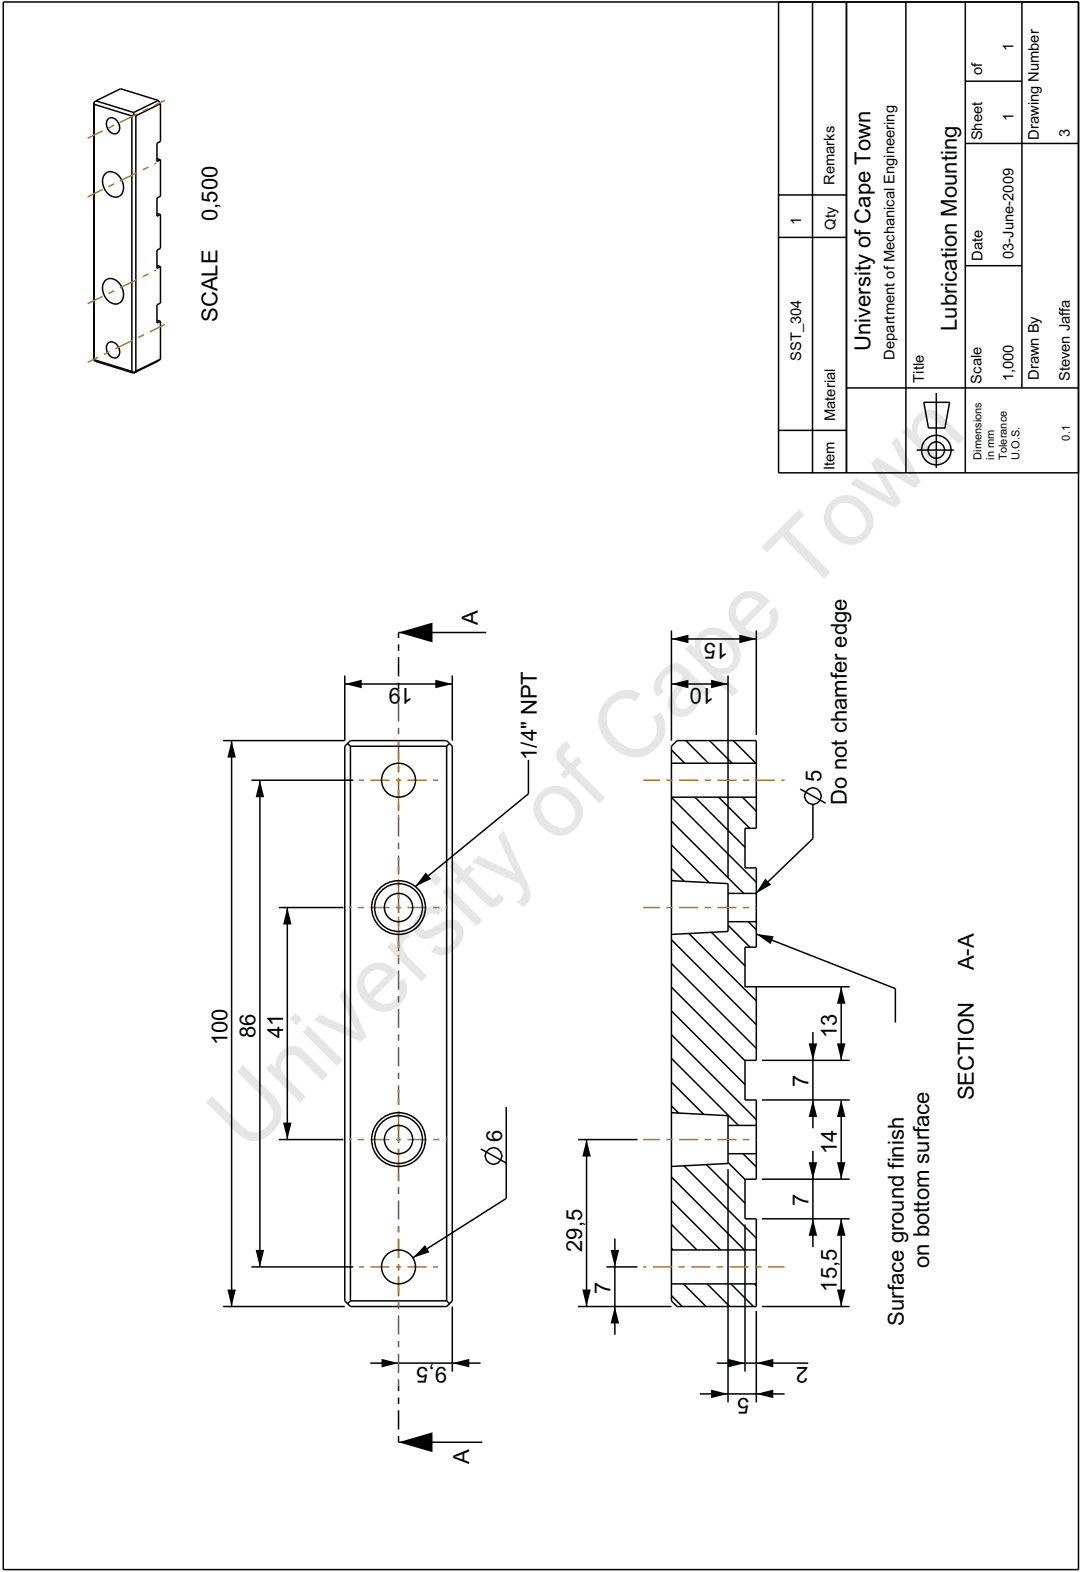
Manufacturing Drawing: Lubrication Mounting.
